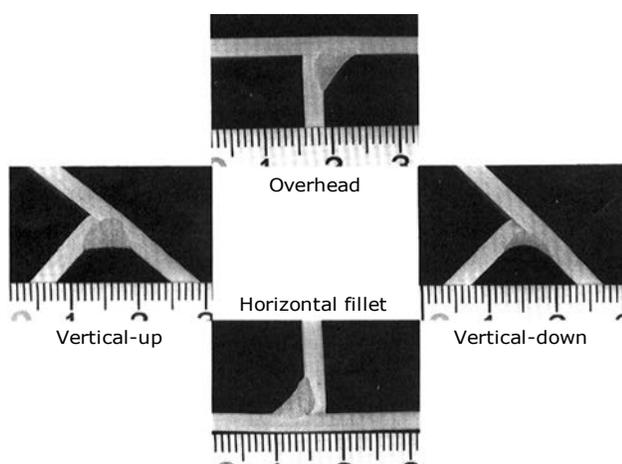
Cross-sectional weld profiles of DW-308LP (Wire size: 1.2 mmØ) with 304-type base metal (Plate thickness: 3 mm).
